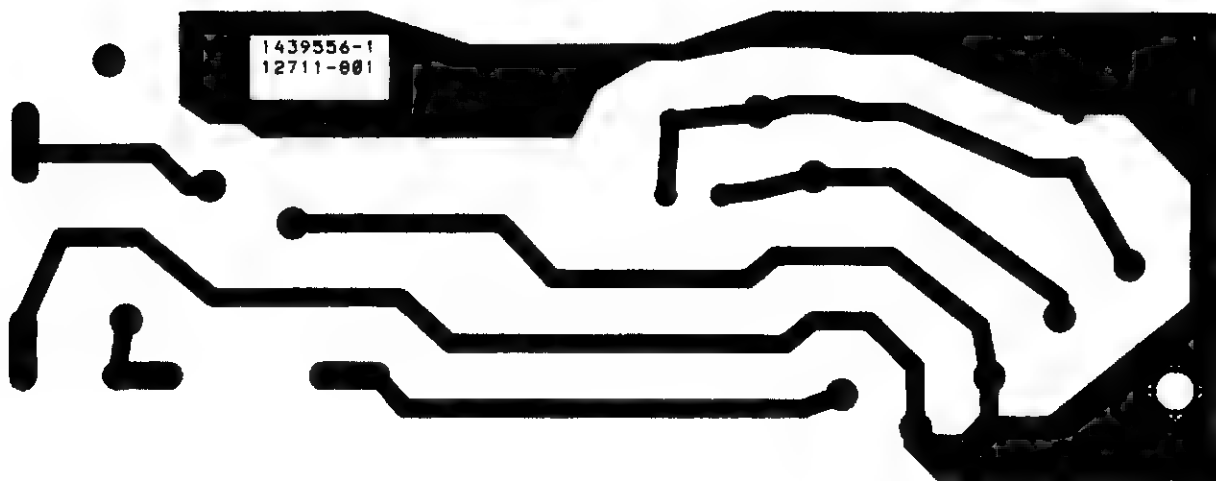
Pick-up Arm Assembly Interconnect Wiring
